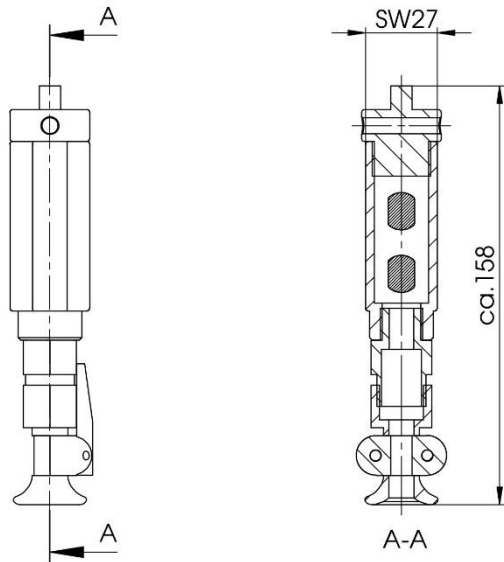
Sectional view KKTO-XX and KKTS-XX
